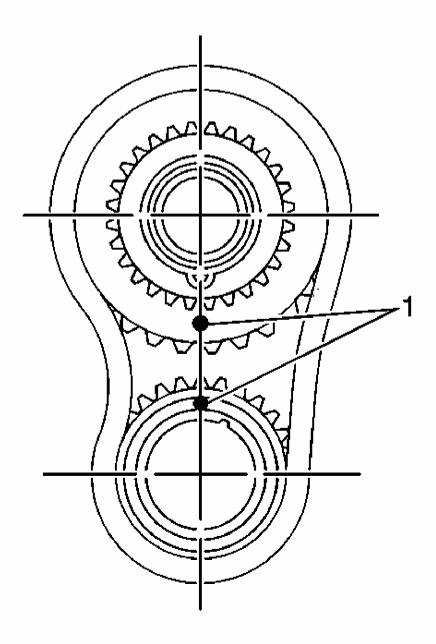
Aligning Timing Marks Of Camshaft Intermediate & Crankshaft
